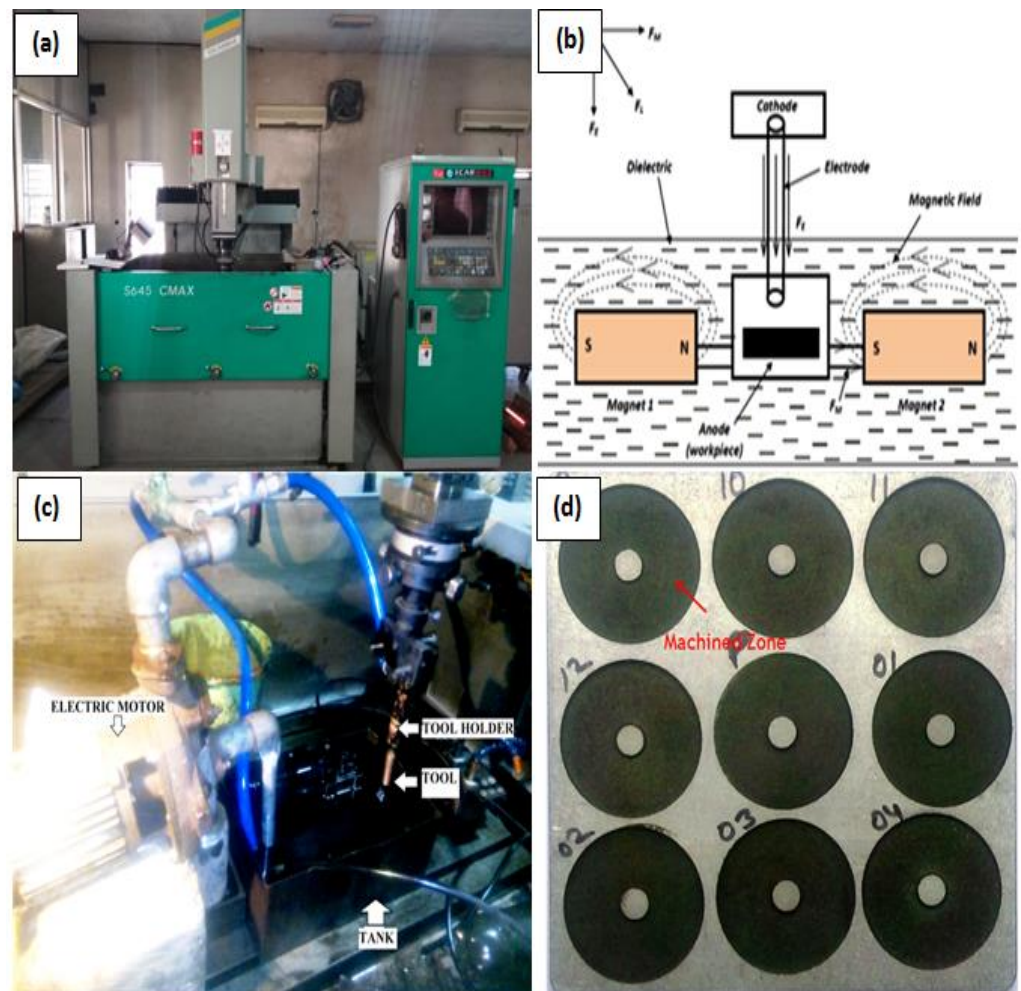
(a) EDM used for experimentation (b) Schematic diagram of MFAPEDM set-up and (c) Powder mixed dielectric set-up (d) machined Al-SiC workpiece.
